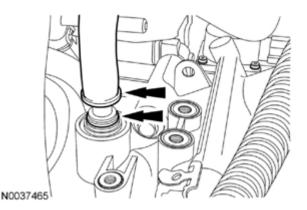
Locating Crankcase Vent Tube Of Valve Cover Courtesy of FORD MOTOR CO.
